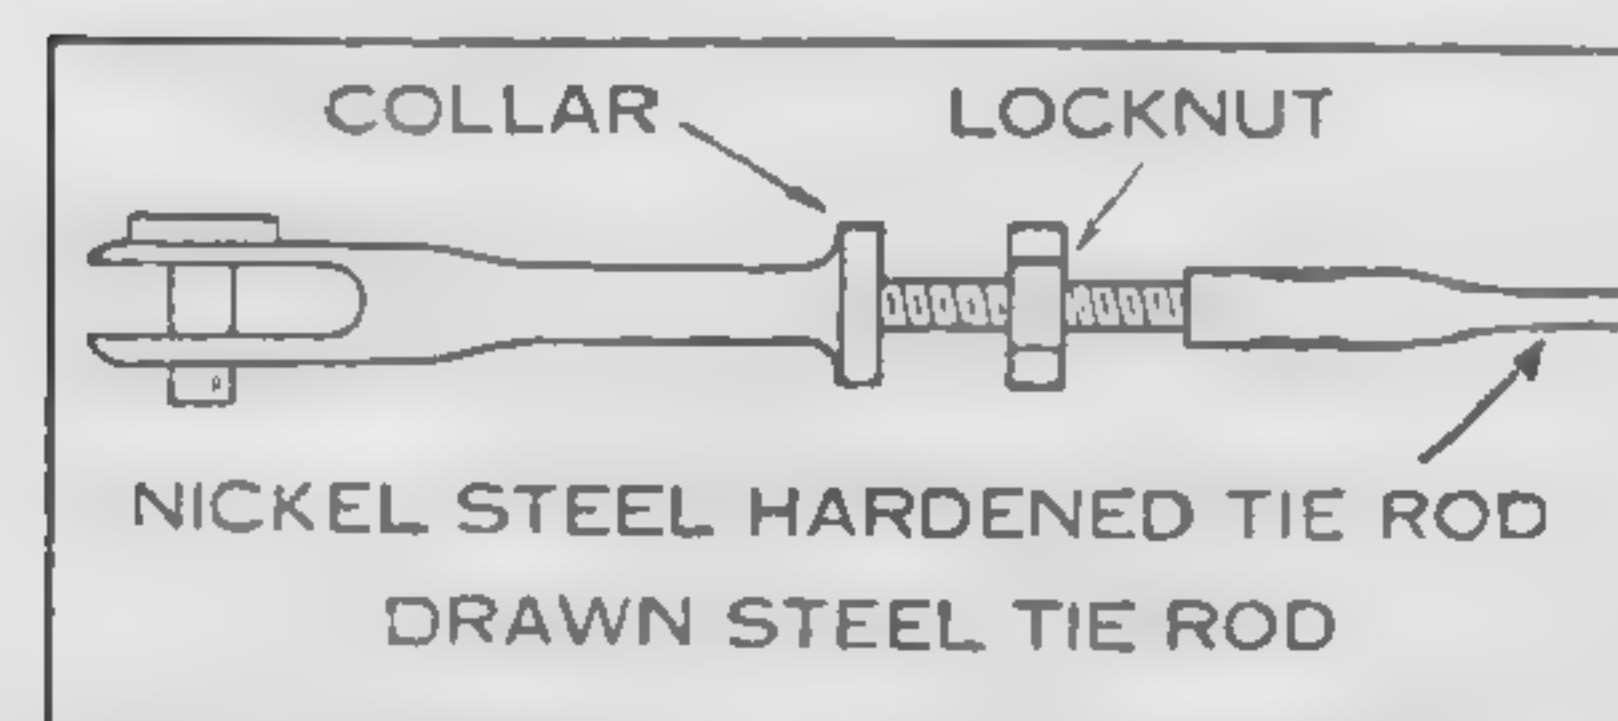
Tie Rods Are Frequently Used Instead of Cables for Bracing
